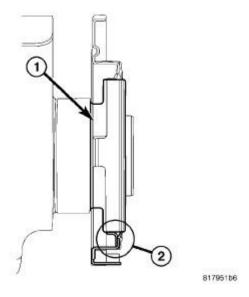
REAR SEAL INSTALLED Courtesy of CHRYSLER LLC
